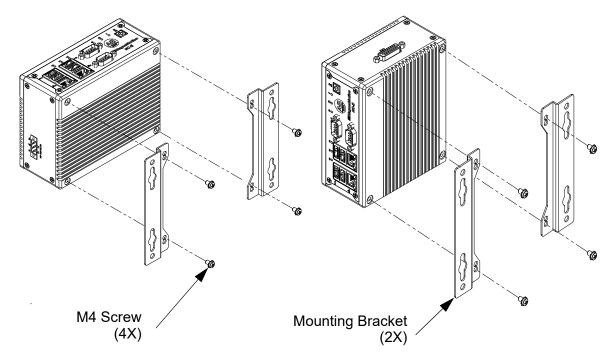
NC-E Series B Node Controller Surface Mounting
